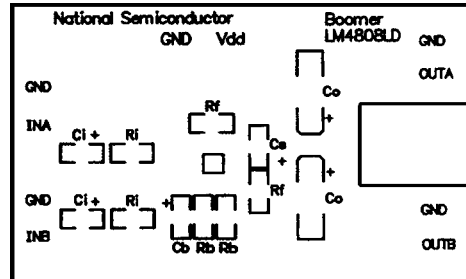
Recommended LD PC Board Layout: Top Silkscreen
